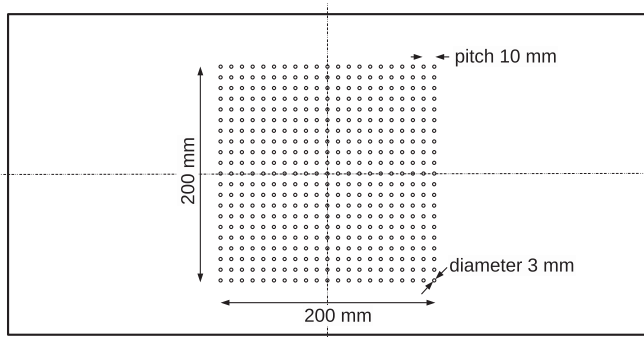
Dimensions of the perforated plate front panel consisting of an array of circular holes arranged in a square grid.
